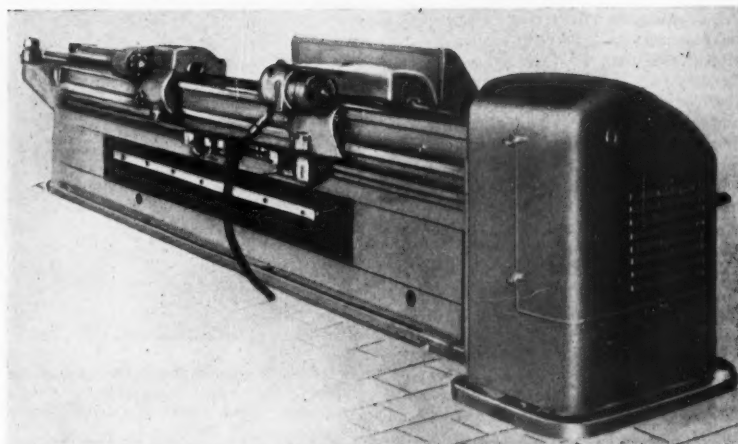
The basic version of the Carlstedt (Swedish) deep-hole boring machine. The smallest version can be used for boring holes $\frac{1}{4}$ in diameter
